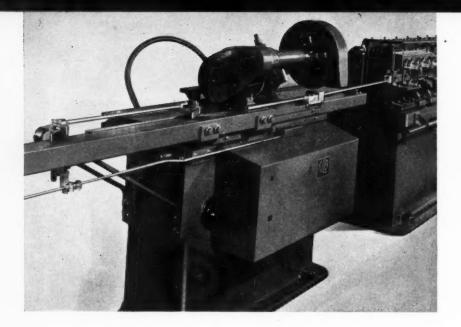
The Circular Saw Type of Cut-off Machine is Especially Suitable for Heavy Sections, and is Widely Used in Tube and Pipe Mills
